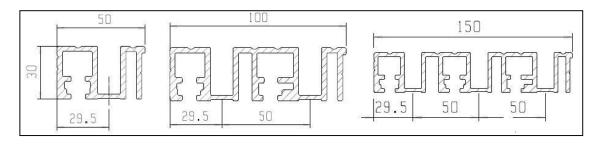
Cross-section –view of one, two and three grooved sill profiles (Sill profile drawings 731388, 722851 and 754672 1998).
